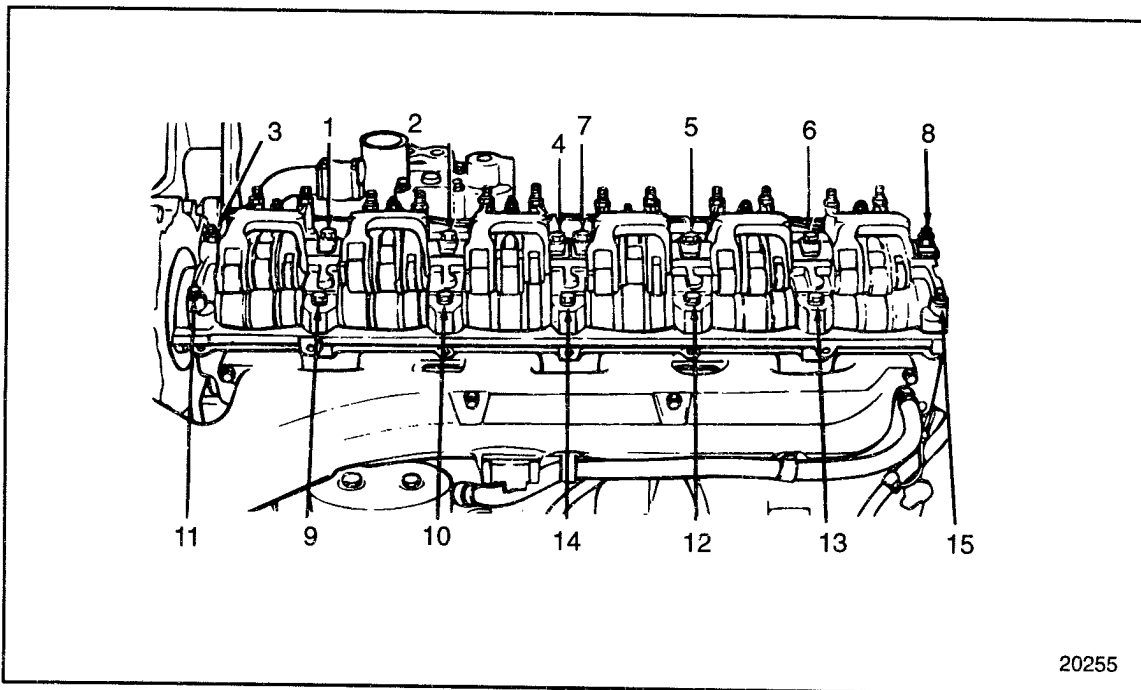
Camshaft Cap and Rocker Arm Shaft Bolt and Nut Torque Sequence
